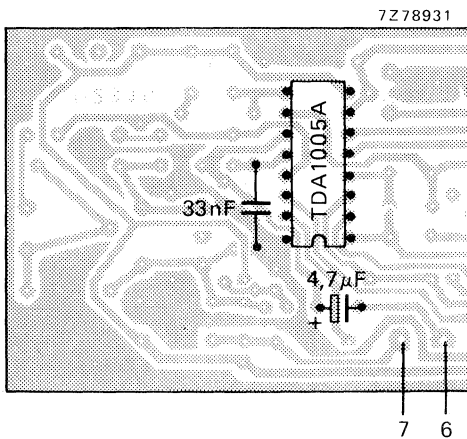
Printed-circuit board component side, showing component layout of Fig. 13.
